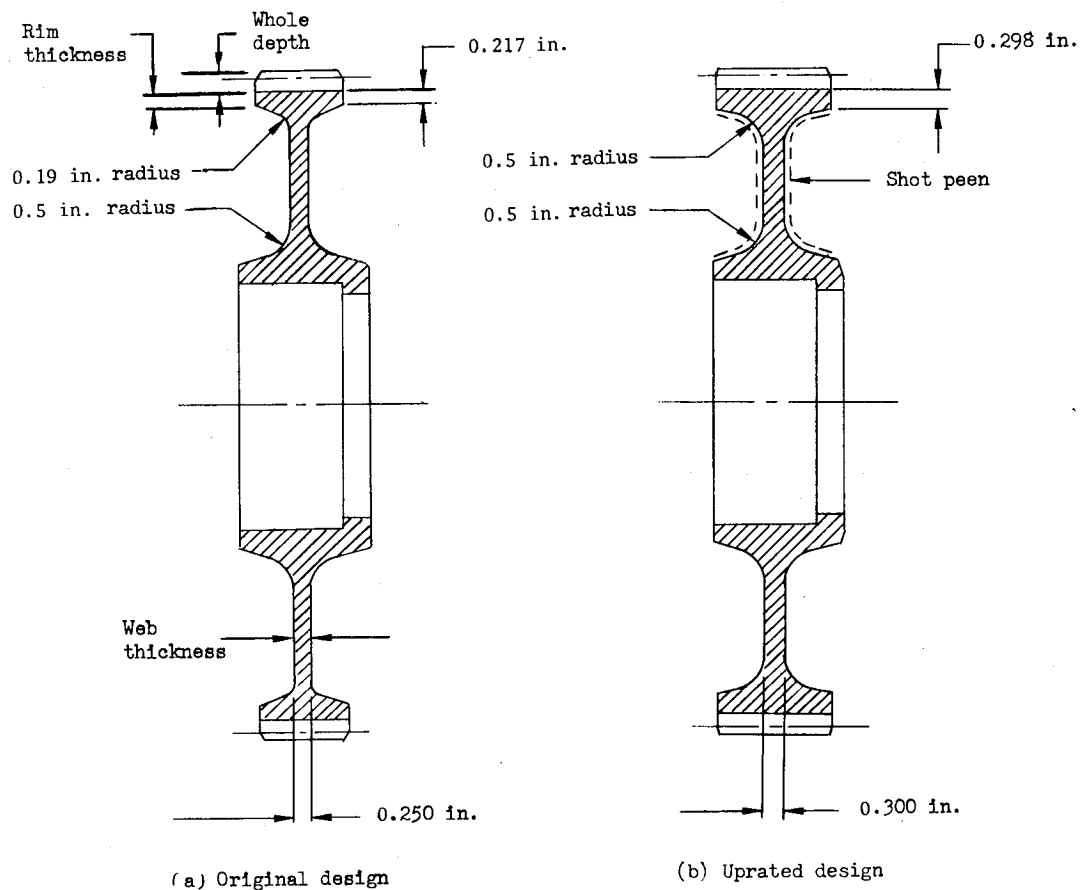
Sketches illustrating rim and web dimensions (original and uprated designs).
